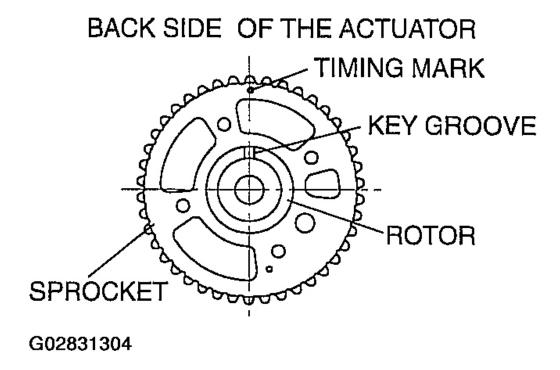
Identifying Variable Valve Timing Actuator Alignment Courtesy of MAZDA MOTORS CORP.
